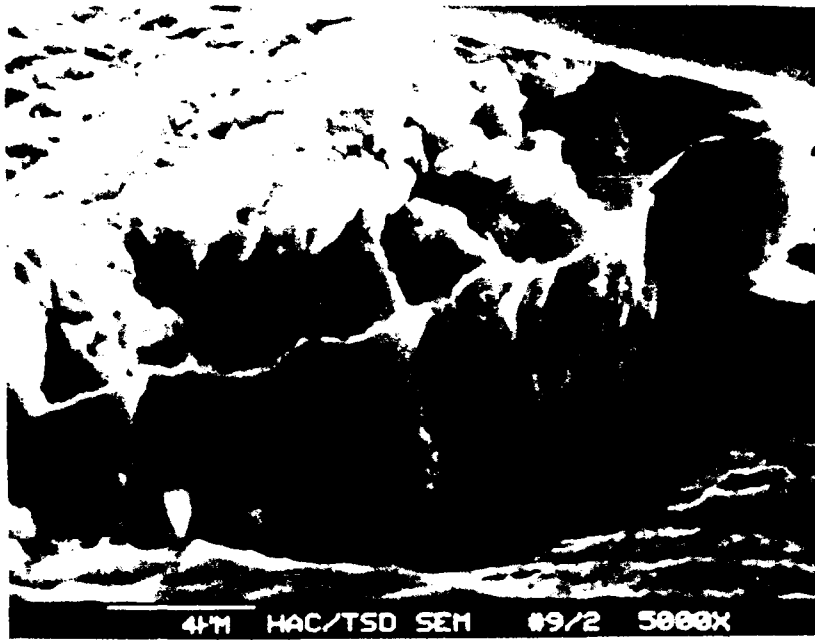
SEM View of Pin 2 Bond Fracture Face Showing Detail of Fracture
